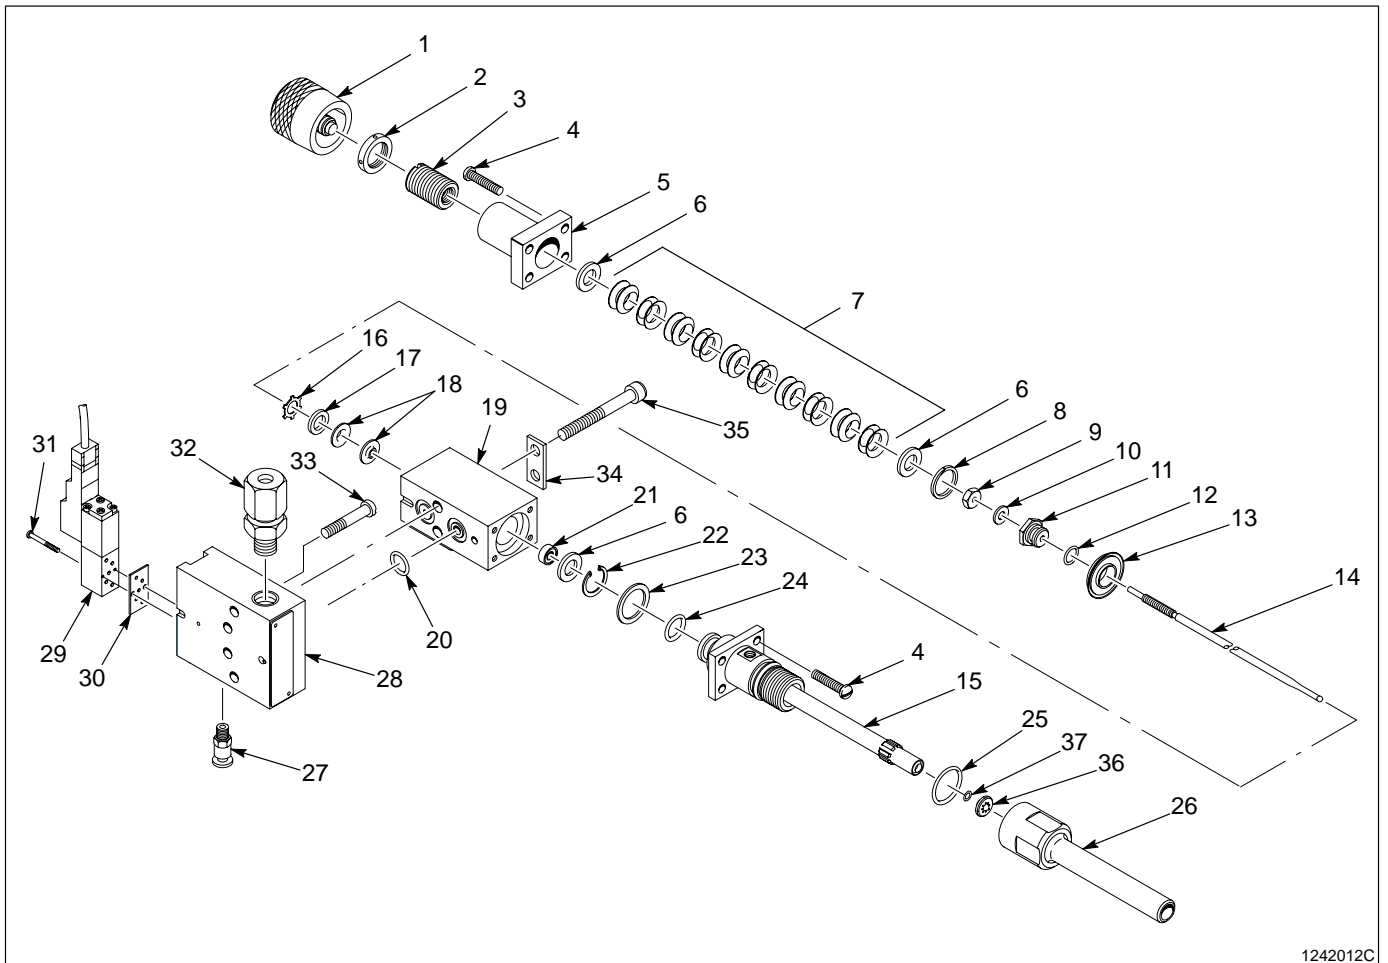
Slim Swirl Applicator Parts (Exploded View)
